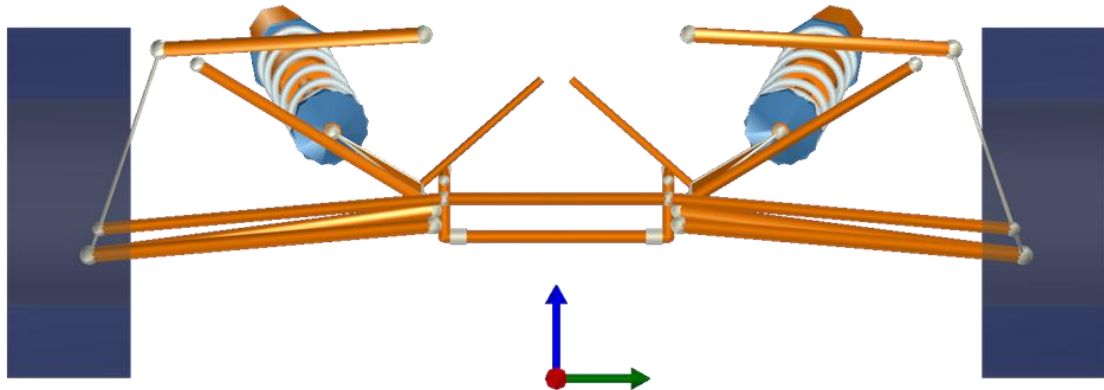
FINAL GEOMETRY, FRONT VIEW
